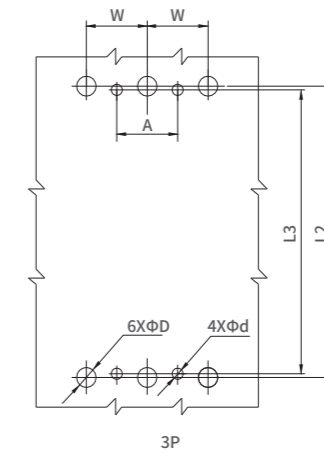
EXM3 series plug-in type outline and mounting dimensions
